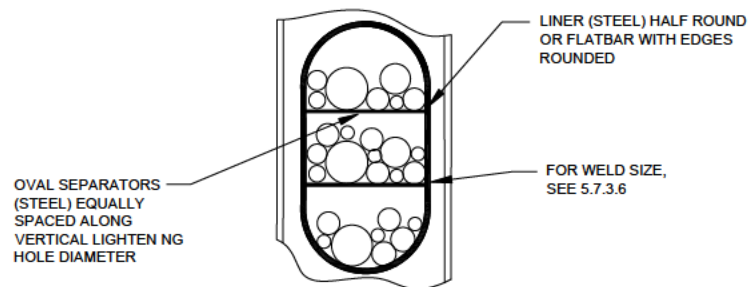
B43. Multiple cableways in machinery spaces (surface ships).
